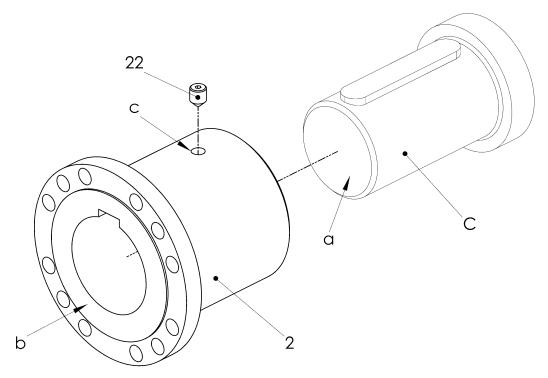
Mounting the hub with cylindrical bore and keyway
